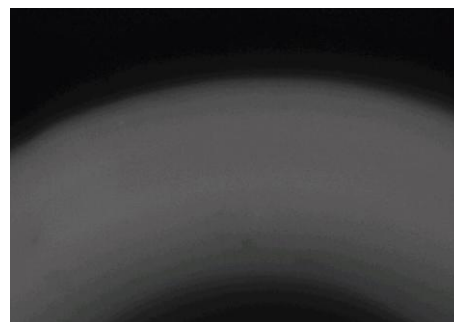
Coaxial camera image of one of the welded polymer rings
